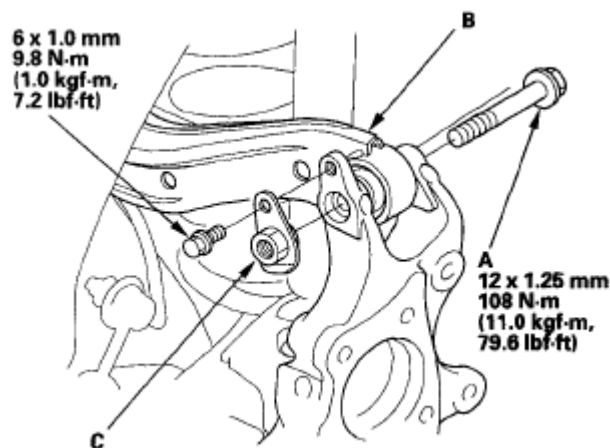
Identifying Wheel Sensor And Brake Hose Mounting Bracket From Knuckle (With Torque Specifications)
